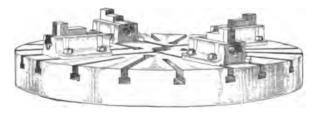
FOUR-JAW CHUCK FOR BORING MILL
